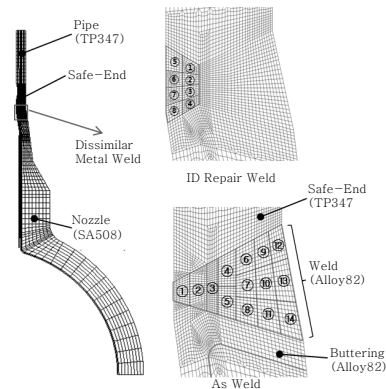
FE mesh and weld pass-profiles of dissimilar metal weld and inner diameter (ID) repair weld
